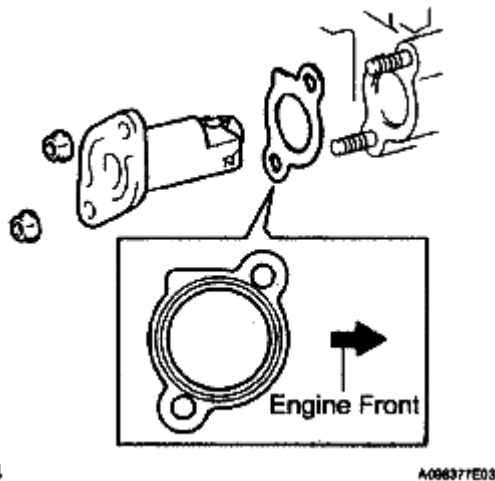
Identifying Gasket And Chain Tensioner With Nuts
